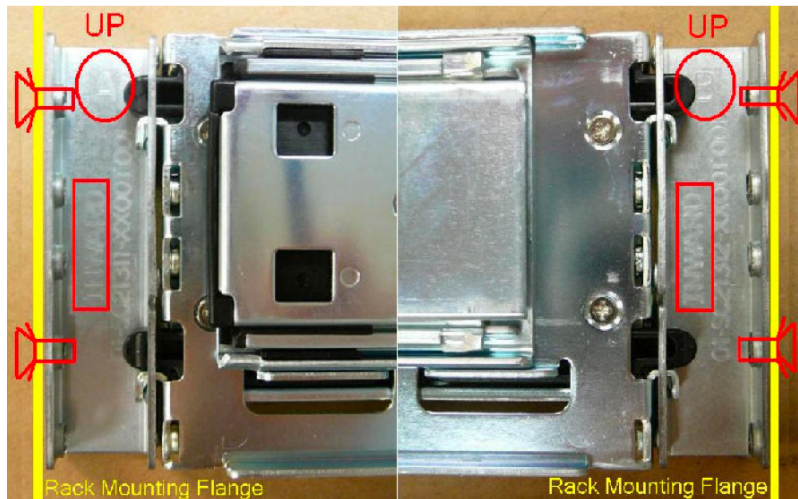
Detailed View of Rail Bracket Mount with Rail (Front and Back)
